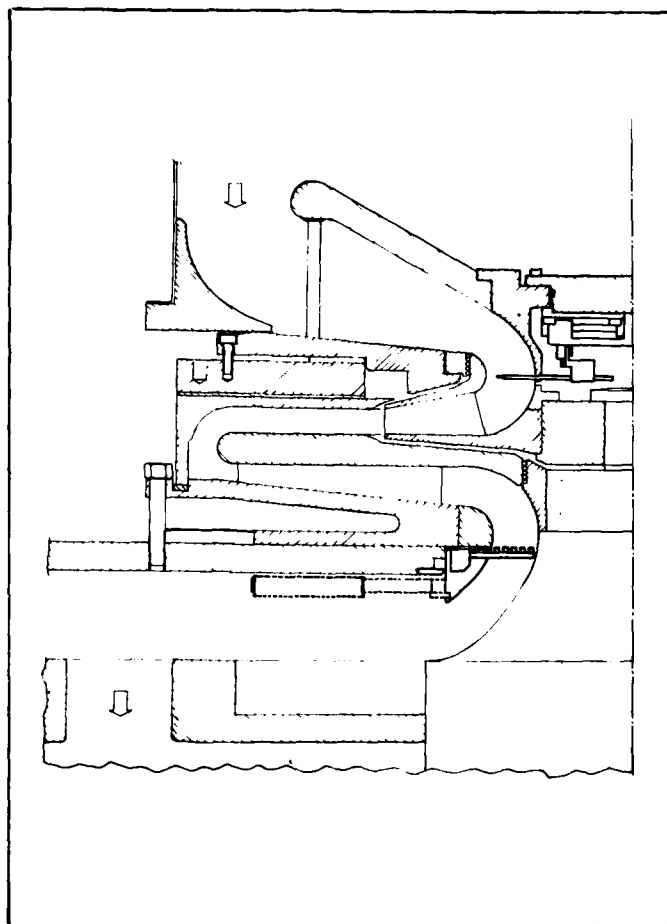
Stage test set-up assembly - Inlet duct without vanes.
